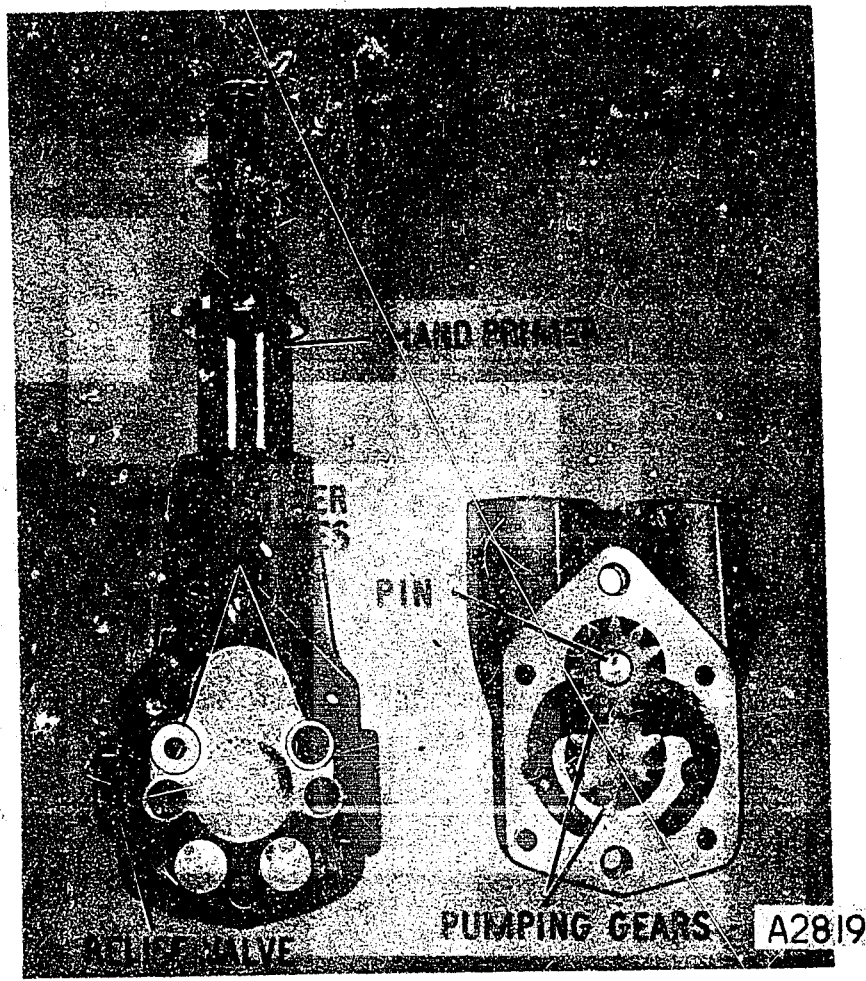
HAND PRIMER CHECK VALVES AND PUMPING GEARS
